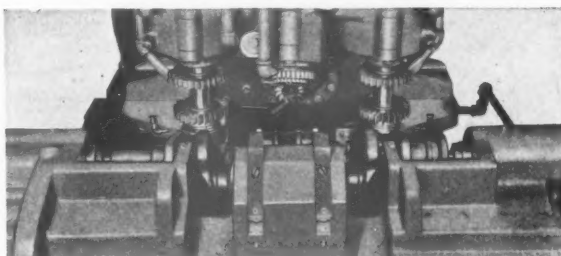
Showing cutter arrangement, and crankshaft forging in automatic hydraulic fixture.
